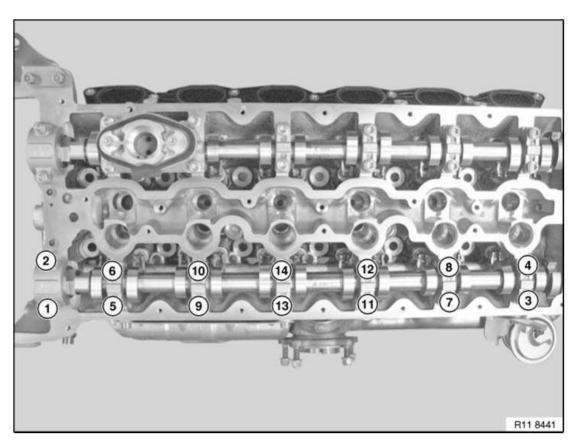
Identifying Camshaft Bearings Bolts Releasing Sequence Courtesy of BMW OF NORTH AMERICA, INC.
